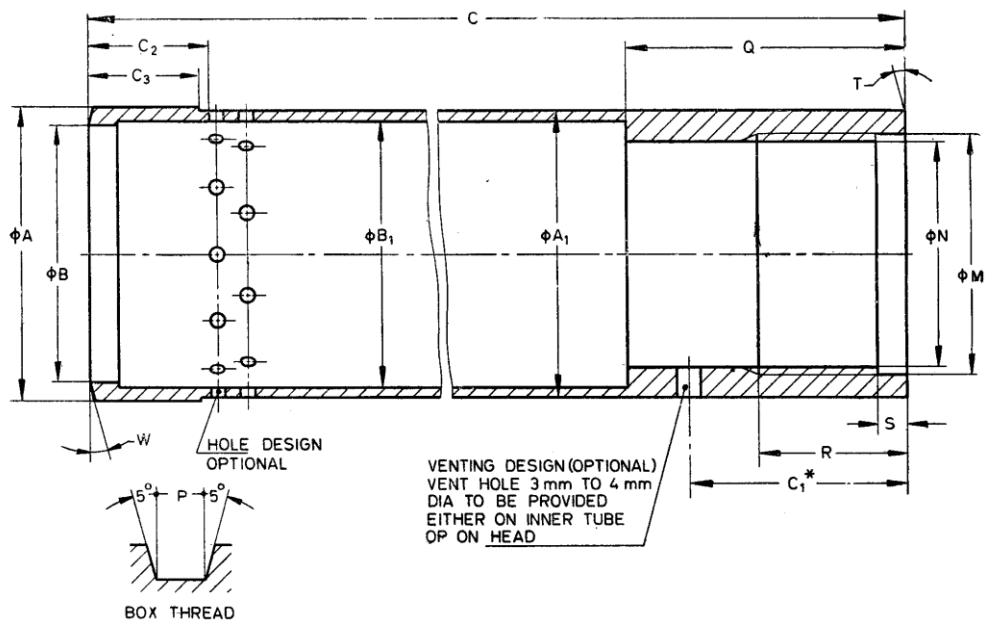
'WT' DESIGN DOUBLE TUBE CORE BARREL — OUTER TUBE
